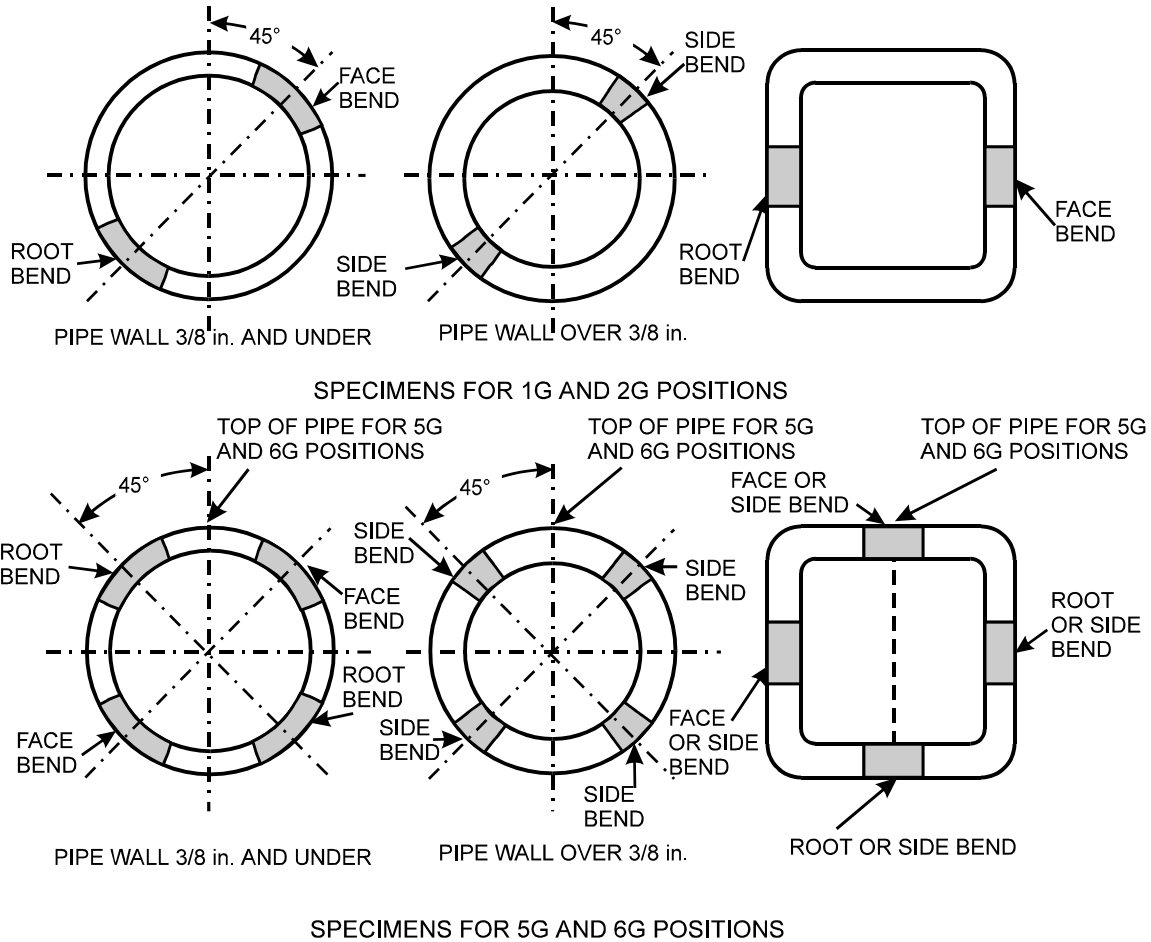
Location of Test Specimens on Welded Test Pipe and Square and Rectangular Tubing — Performance Qualification (see 5.25.4)
